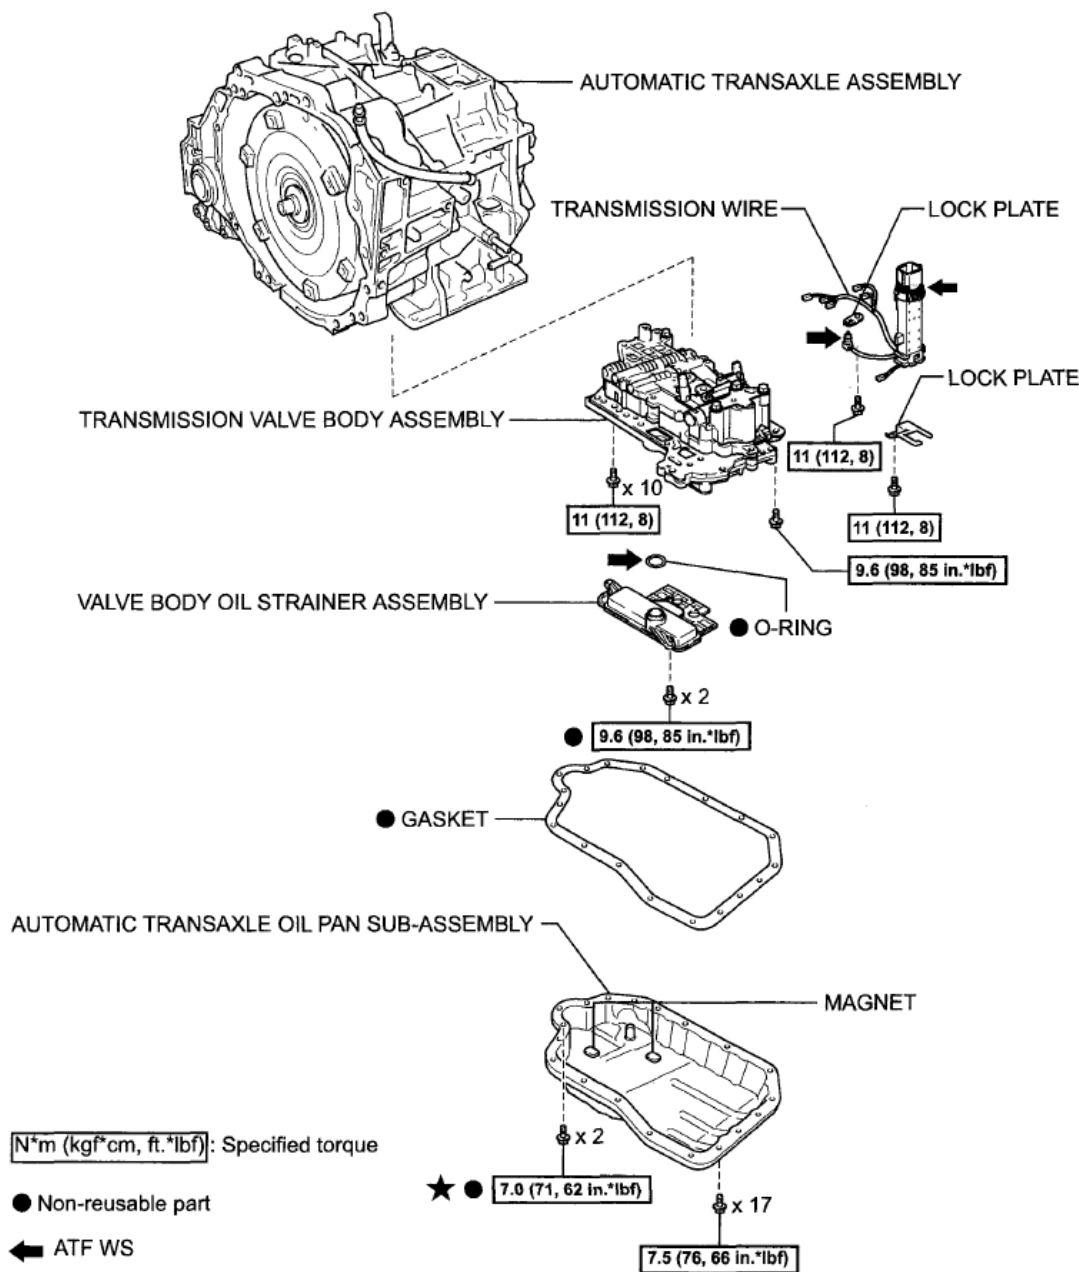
Identifying Automatic Transaxle Assembly Components With Torque Specification
